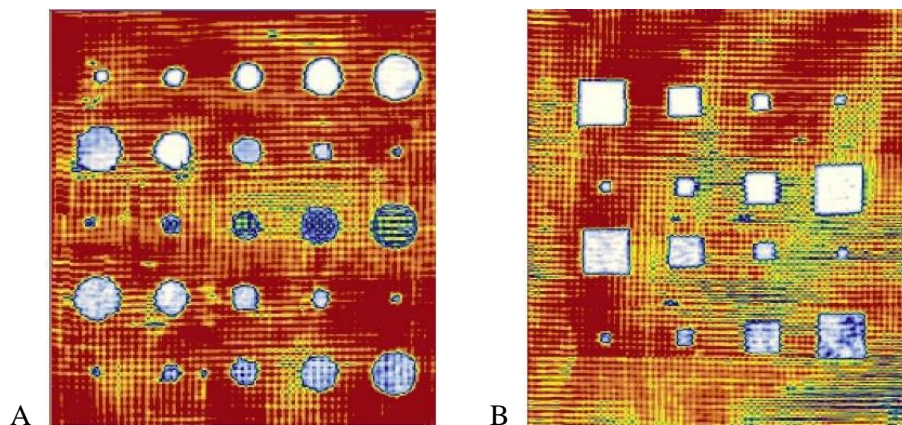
C-Scan images obtained with via ultrasonic testing: 15-ply panel containing machined FBHs (A); 16-ply panel containing PTFE inserts (B).
